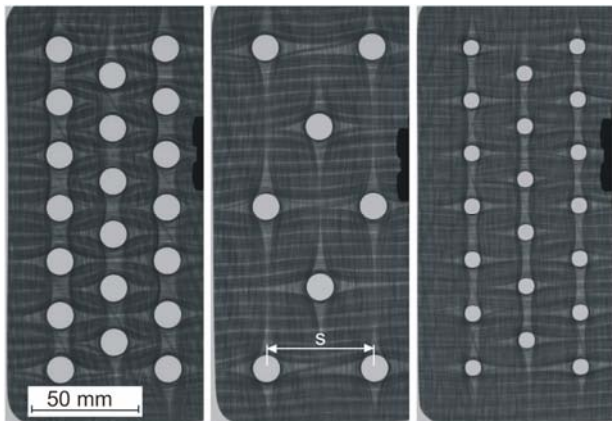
X-ray images of joining zones with moulded holes at different hole diameters and hole patterns
